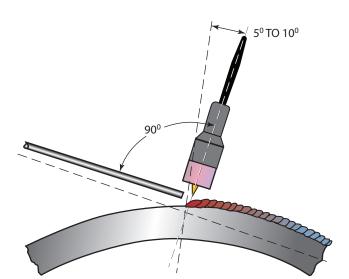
Alignment of torch and rod for pipe welding.
